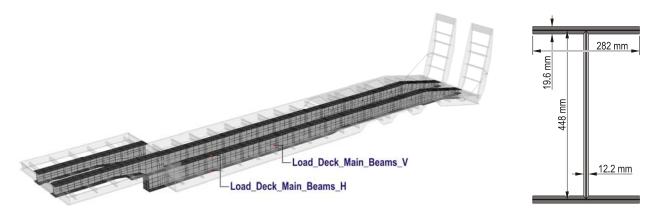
FE model of the longitudinal main beams and their cross-section
